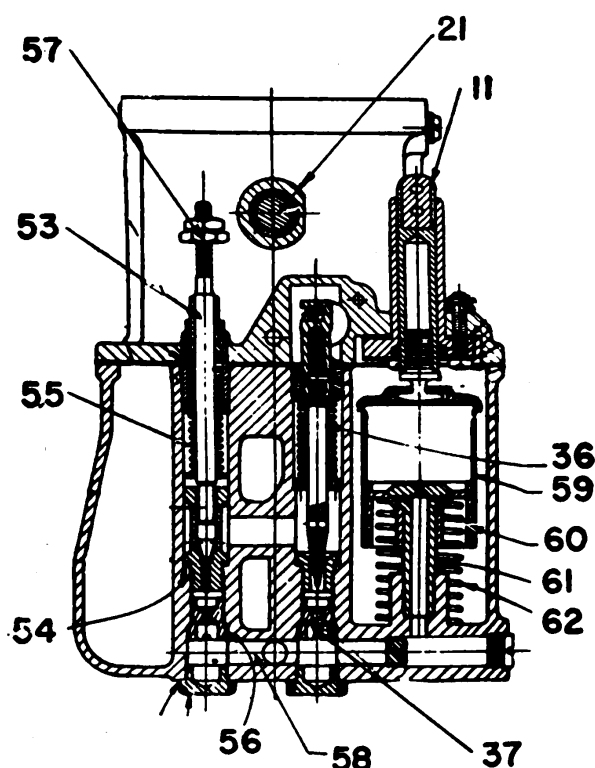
Economizer and accelerator pump used on Stromberg float-type carburetors.
